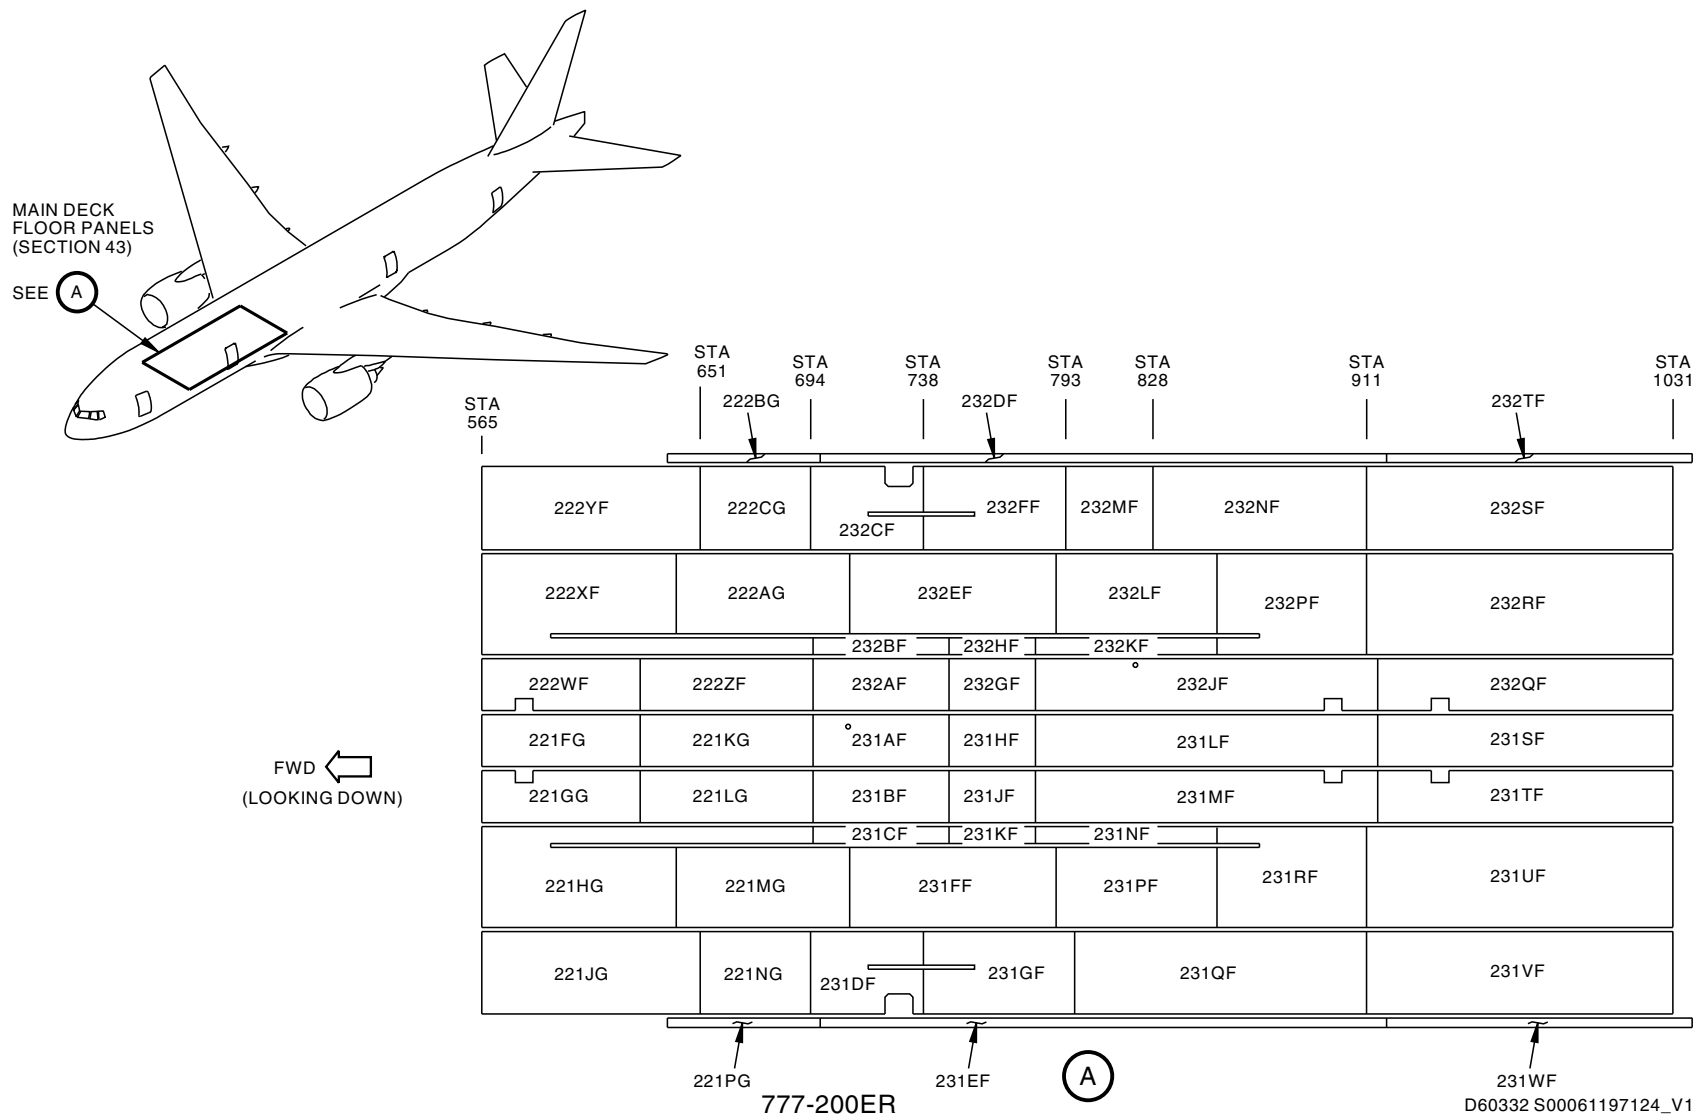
ZONES 221/222, 231/232 PASSENGER FLOOR PANELS
